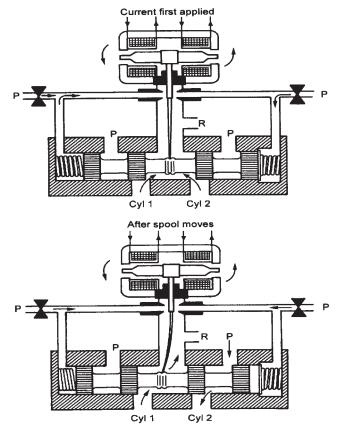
Torque Motor and Flapper-Nozzle Valve Cross-section
